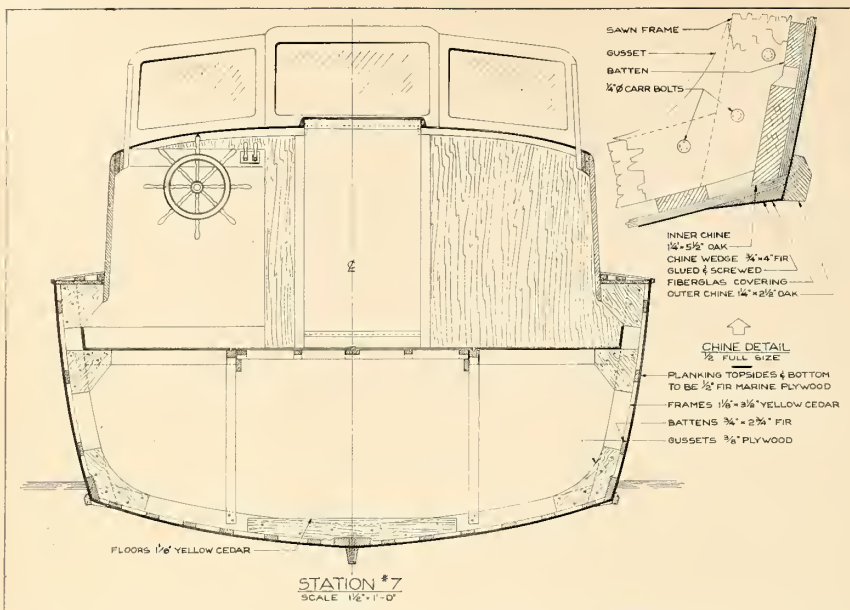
Typical Construction Section of a 32 ft. Plywood Power Cruiser. This shows the spacing of longitudinal support for the plywood planking and the emphasis on support along the edges.
